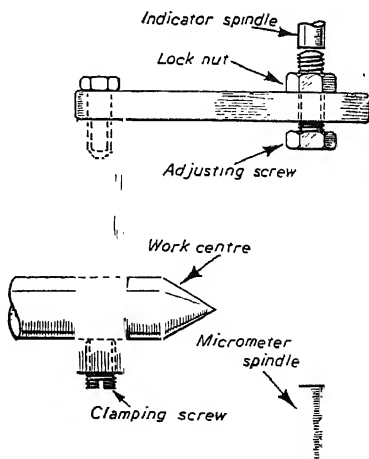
Bracket clamped to work-carrying centre for "odd flute," or one-wire method of diameter measuring of taper threads.
